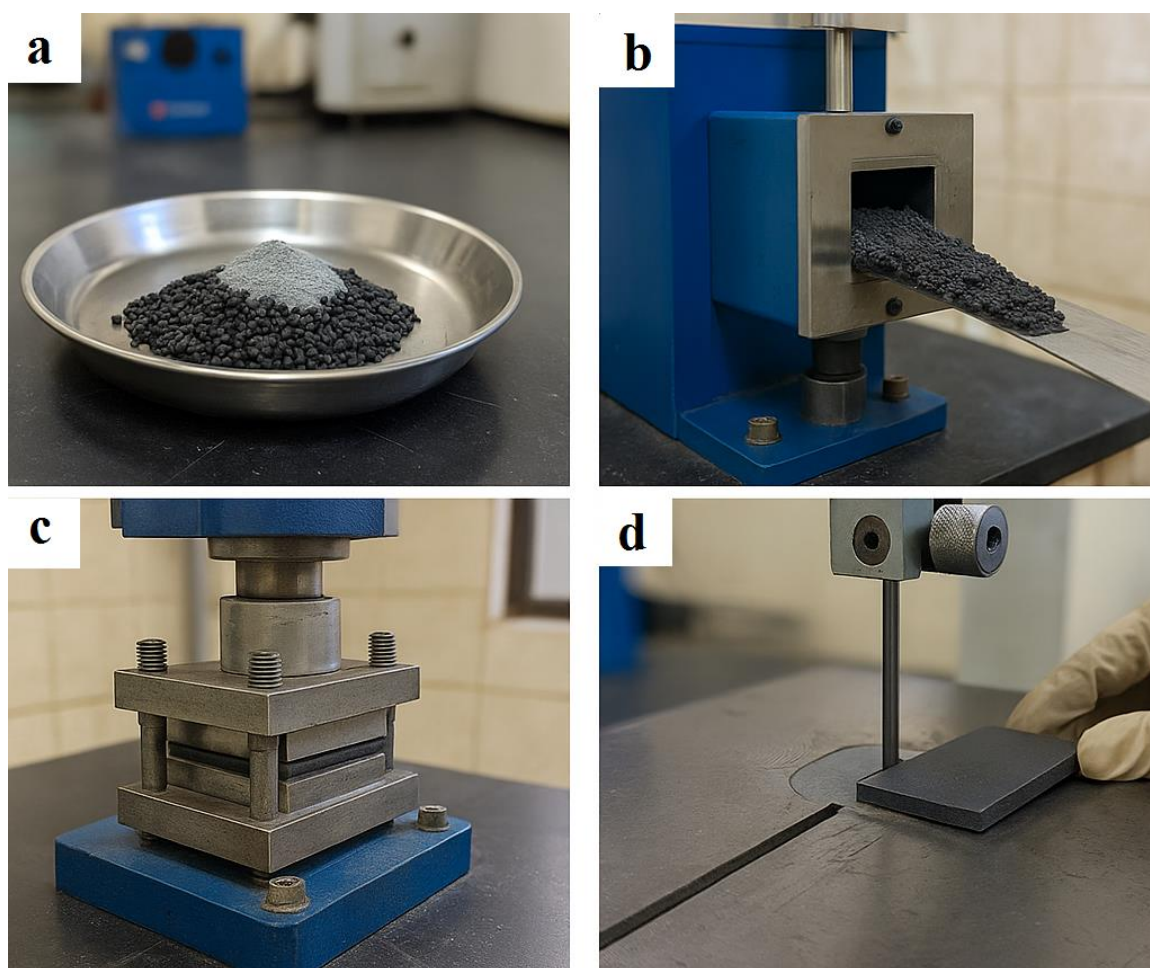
Step-by-step fabrication of polymer–micro aluminum composites: (a) polypropylene pellets mixed with micro aluminum powder, (b) compounding in twin-screw extruder, (c) compression molding into sheets, and (d) cutting specimens for testing.
